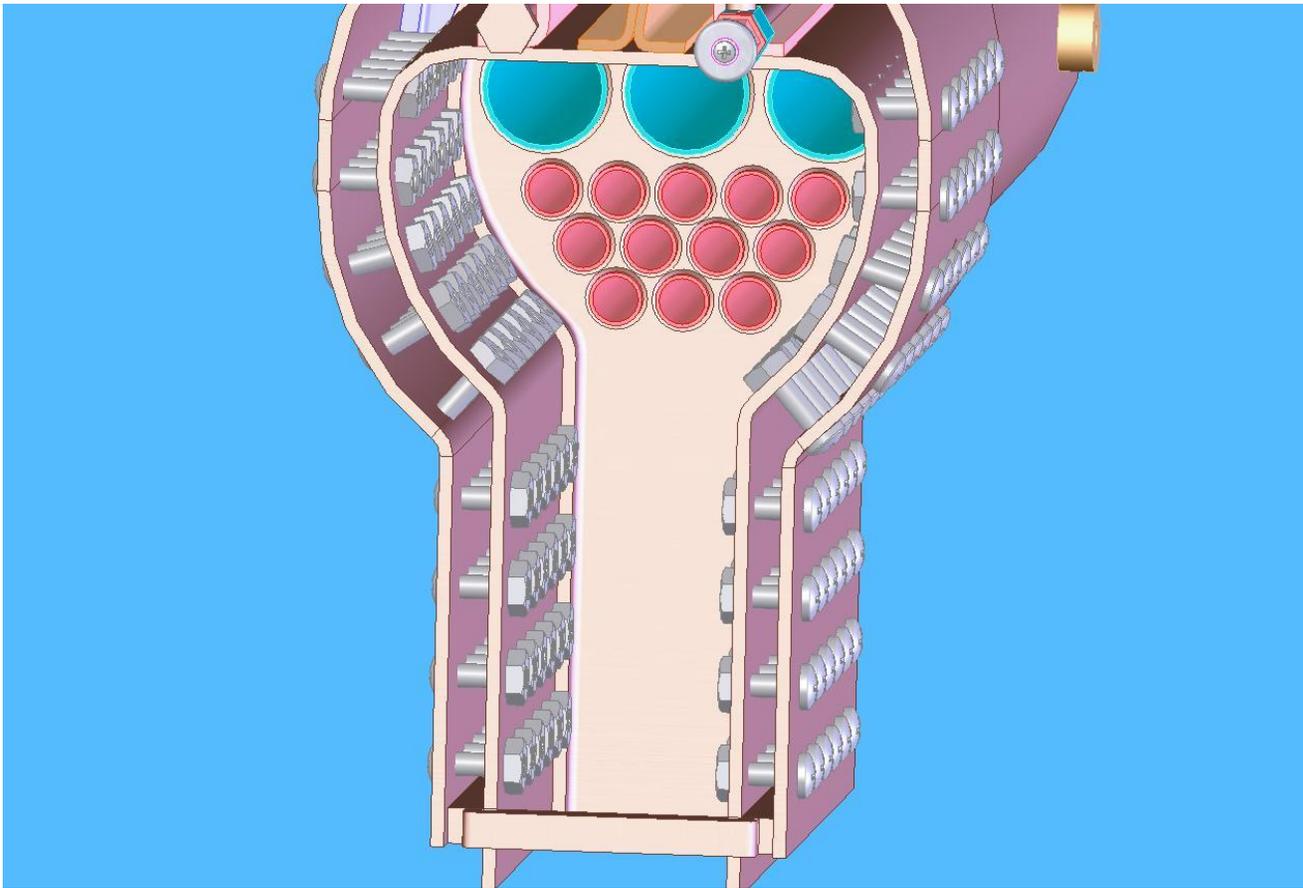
Internal view of Boiler Stays with Throat and Firebox End Flanges removed.
